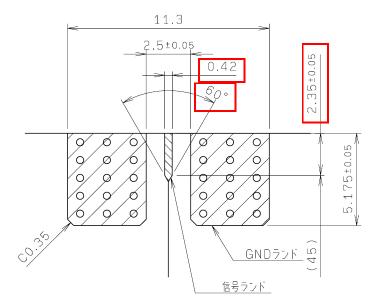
Detail of Top Side SMA End Launch Connector Pad
